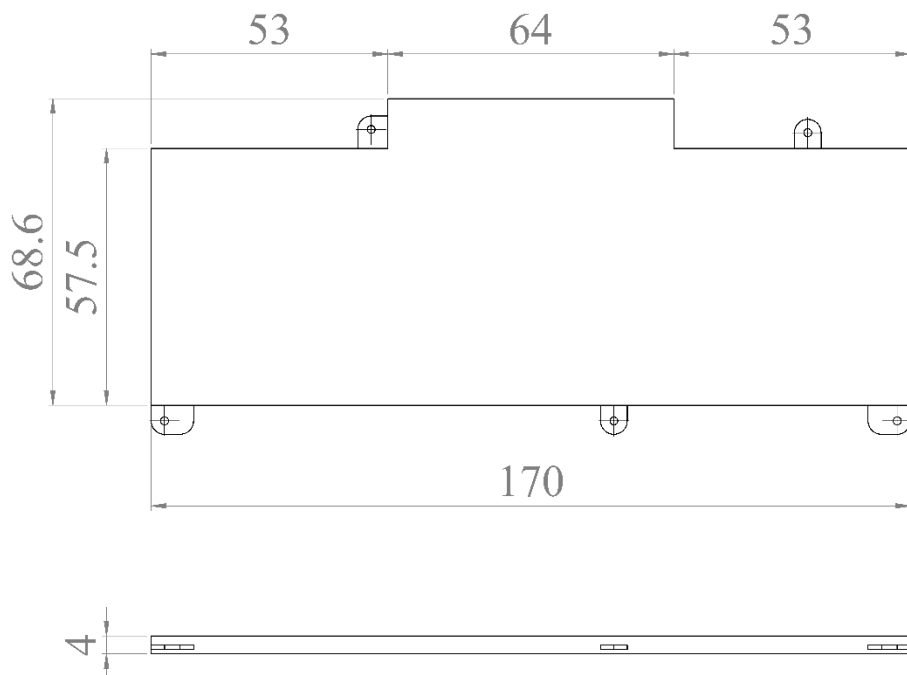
Dimensioned drawings of the battery, all dimensions are in mm
